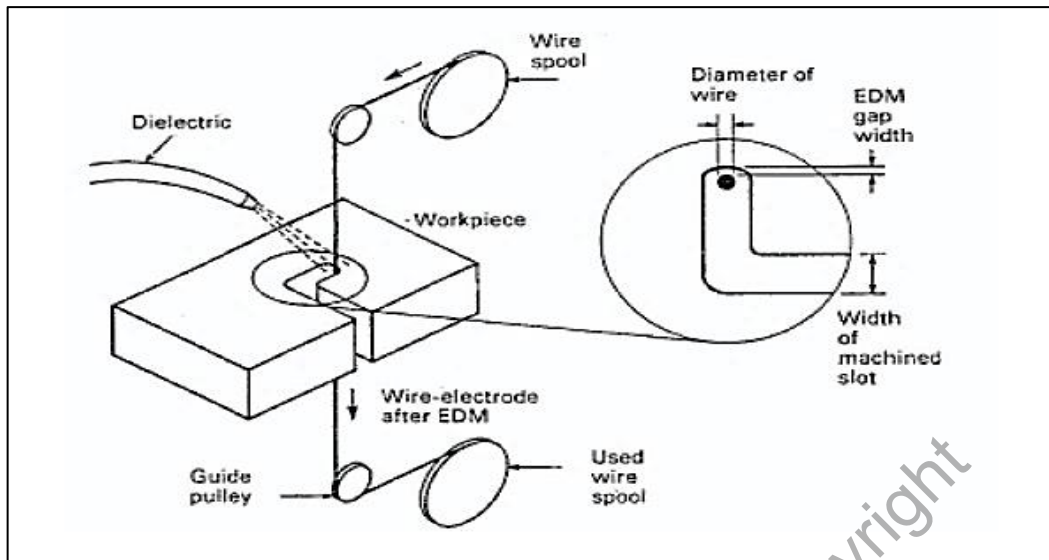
Fabrication of kerf by using Wire Electrical Discharged Machining (WEDM) (Selvam & Kumar, 2017)
